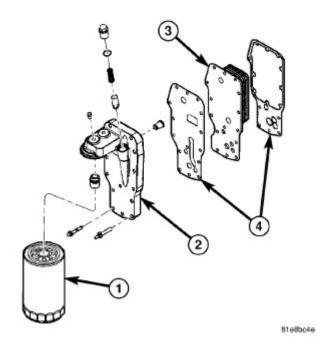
Oil Filter, Oil Cooler Housing, Oil Cooler & Gaskets Courtesy of CHRYSLER GROUP, LLC
